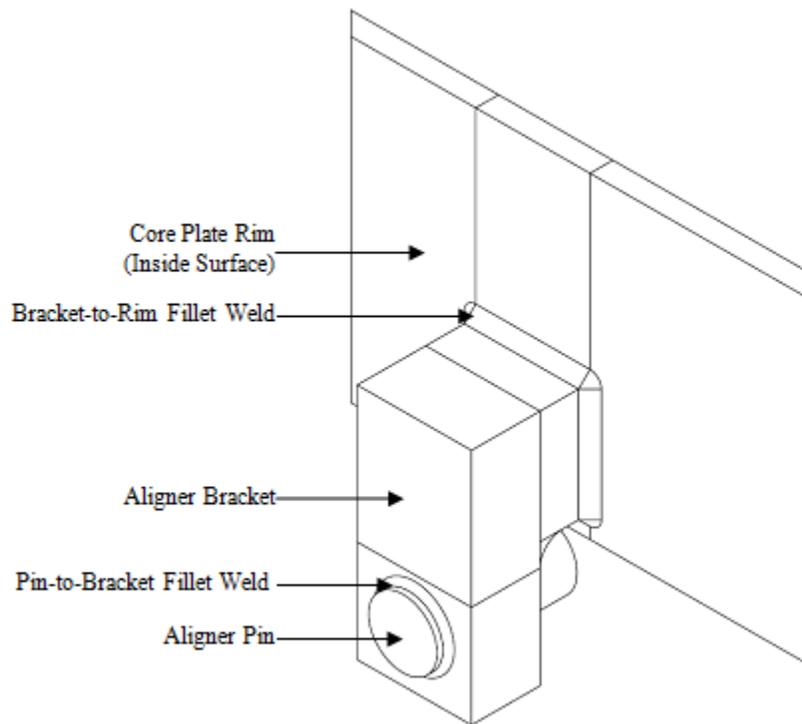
General View of Aligner Pin and Bracket Assembly
